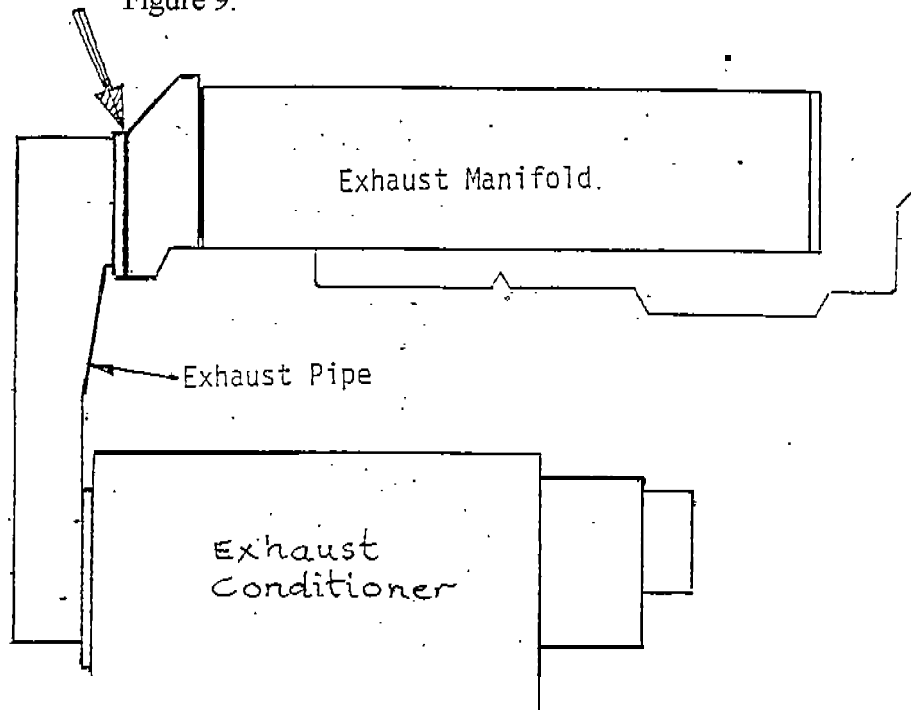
, Gasket between Exhaust Pipe and Exhaust Manifold Flange
